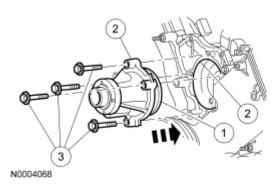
Installing Coolant Pump Courtesy of FORD MOTOR CO.
